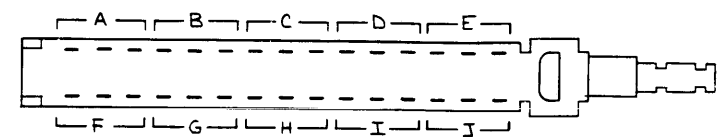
A7 Front/Rear Switch PCB Assembly
